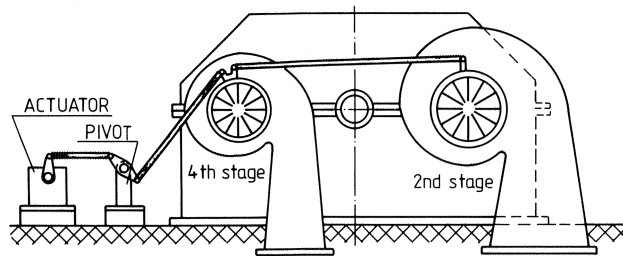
Mechanical Guide Vane Actuator Linkage System.
